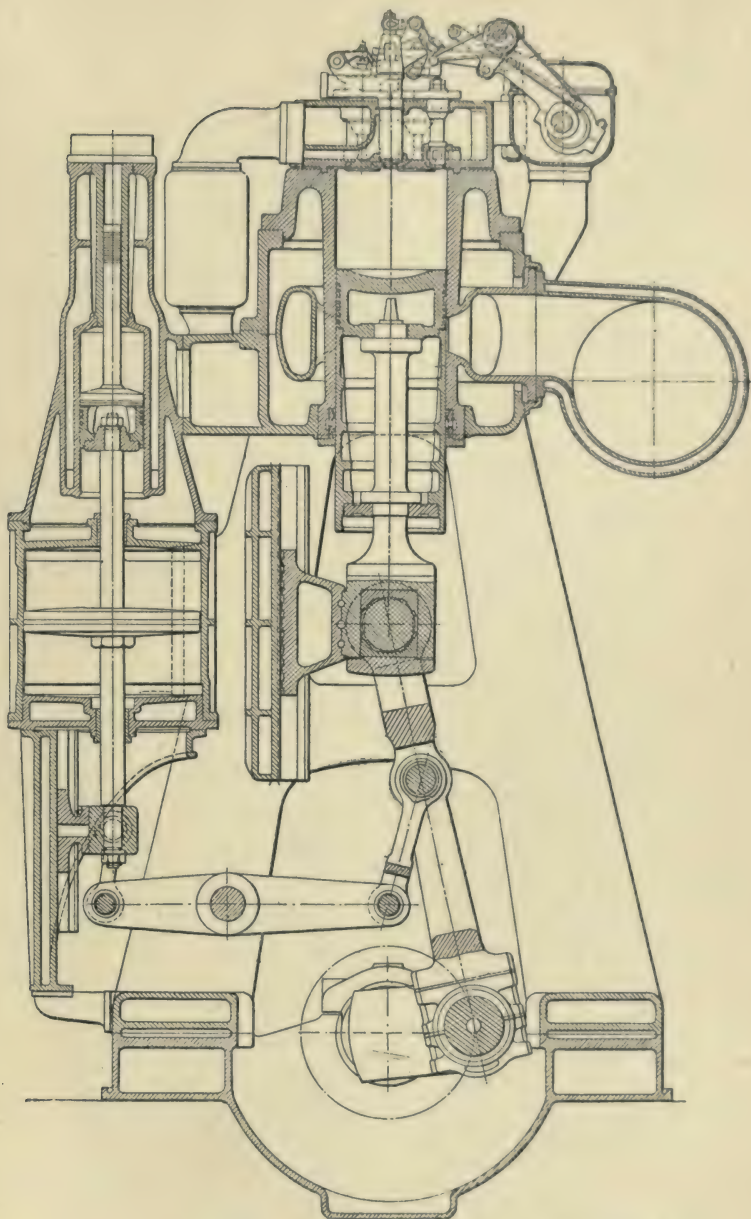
Two-stroke Diesel oil engine, crosshead type (Tosi).
